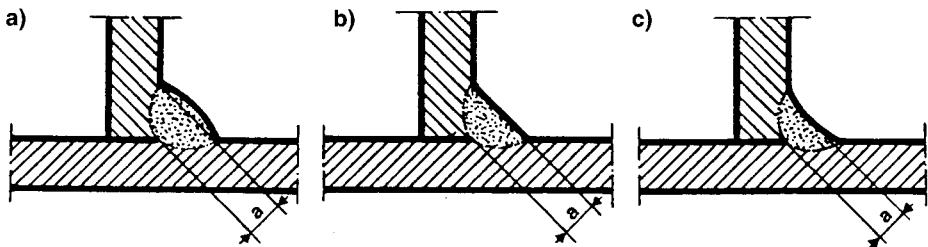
Fillet weld shapes a) convex b) plane c) concave defining throat thickness "a"
